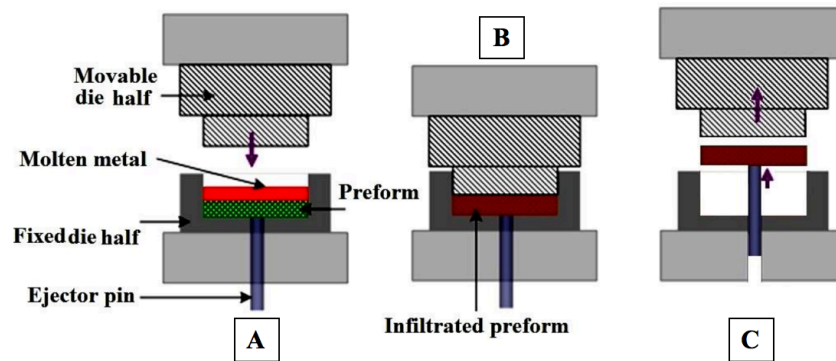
Steps for squeeze casting of Al-CNT composites A) poured molten metal on CNT preform in a die, B) infiltrating the preform by aluminum via squeezing, and C) ejecting the formed composite.[123]
